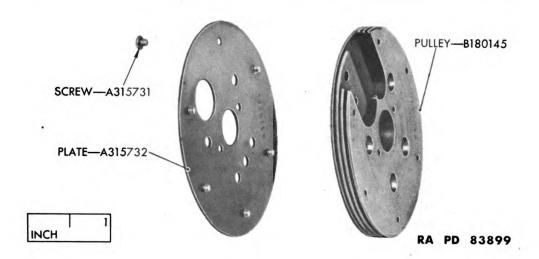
Inside Plate Exploded From Movable Wollaston Prism Actuating Pulley
